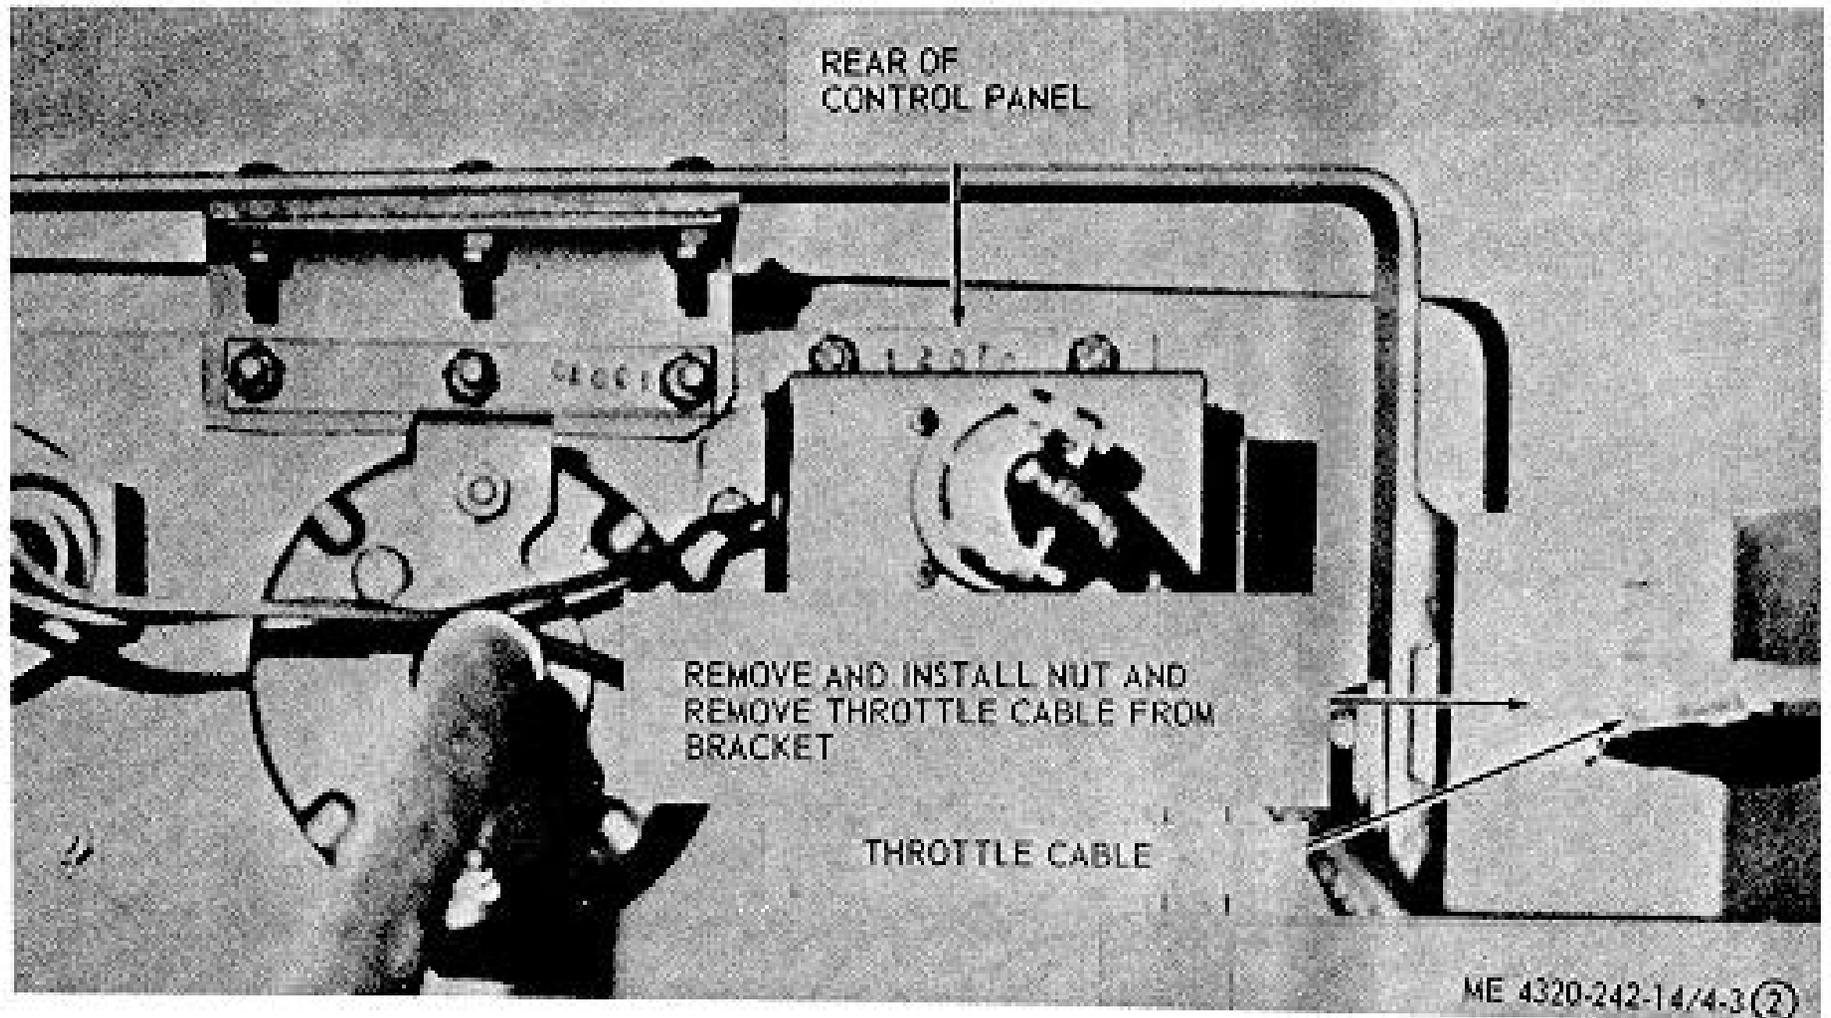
Throttle cable, removal and installation. (Sheet 2 of 2).
